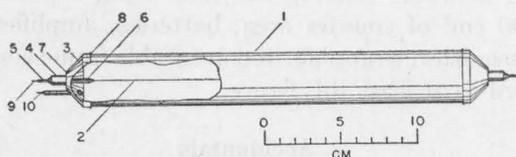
Light weight Geiger counter: 1. Metal cylinder is formed from copper plated sheet steel, 0.025-cm thick. The joint is a locked seam that is silver soldered together simultaneously with 7 and 8; 2. tungsten wire, 0.0025 cm in diameter; 3. copper plated steel caps; 4. Kovar eyelet containing glass bead; 5. small Kovar tubing; 6. glass covering to Kovar tubing; 7, 8. silver soldered joints; 9. pinched when wire is taut, then silver soldered; 10. tubulation. Copper tubing is pinched to a feather edge to seal. Weight of completed counter, 90 g; sensitive area, 80 cm².
